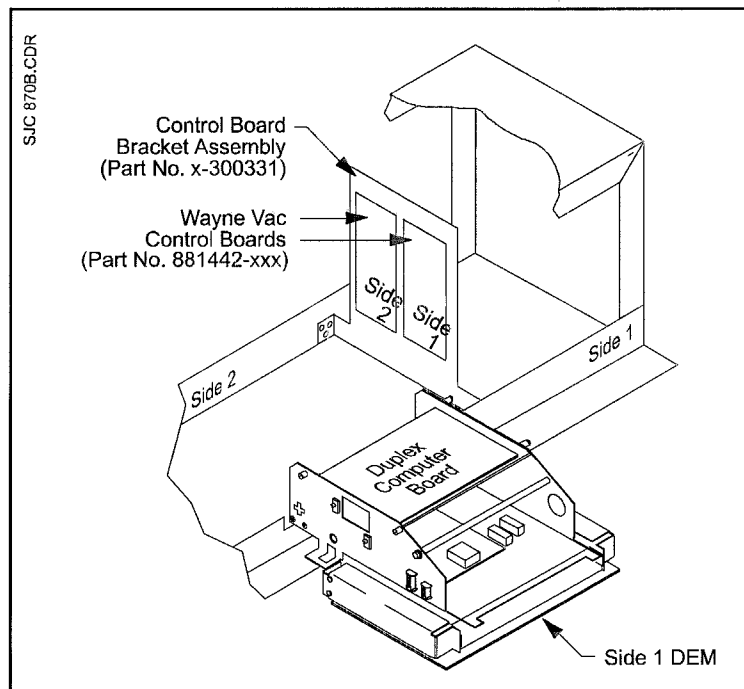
Wayne Vac Control Board Bracket Assembly
